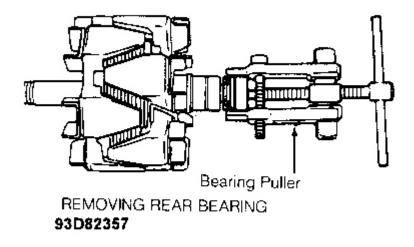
Overhauling Generator (2 Of 6) Courtesy of MAZDA MOTORS CORP.
